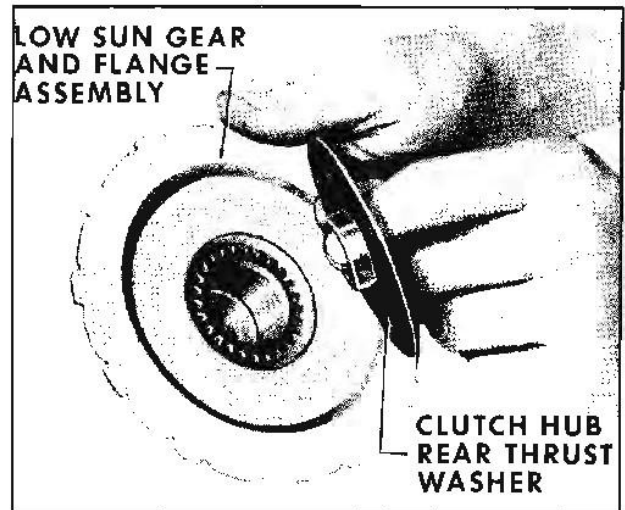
B-84 Installing Clutch Hub Rear Thrust Washer
